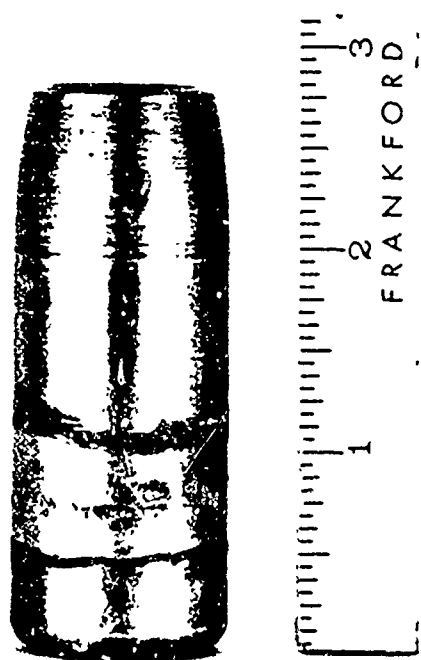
Welded Overlay Band Removed by Selective Etching
